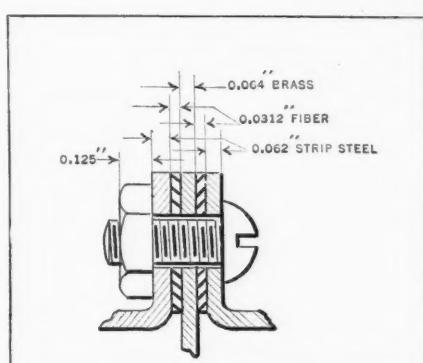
Example Illustrating Method of Determining Length of Screw for Holding Five Assembled Sheets
